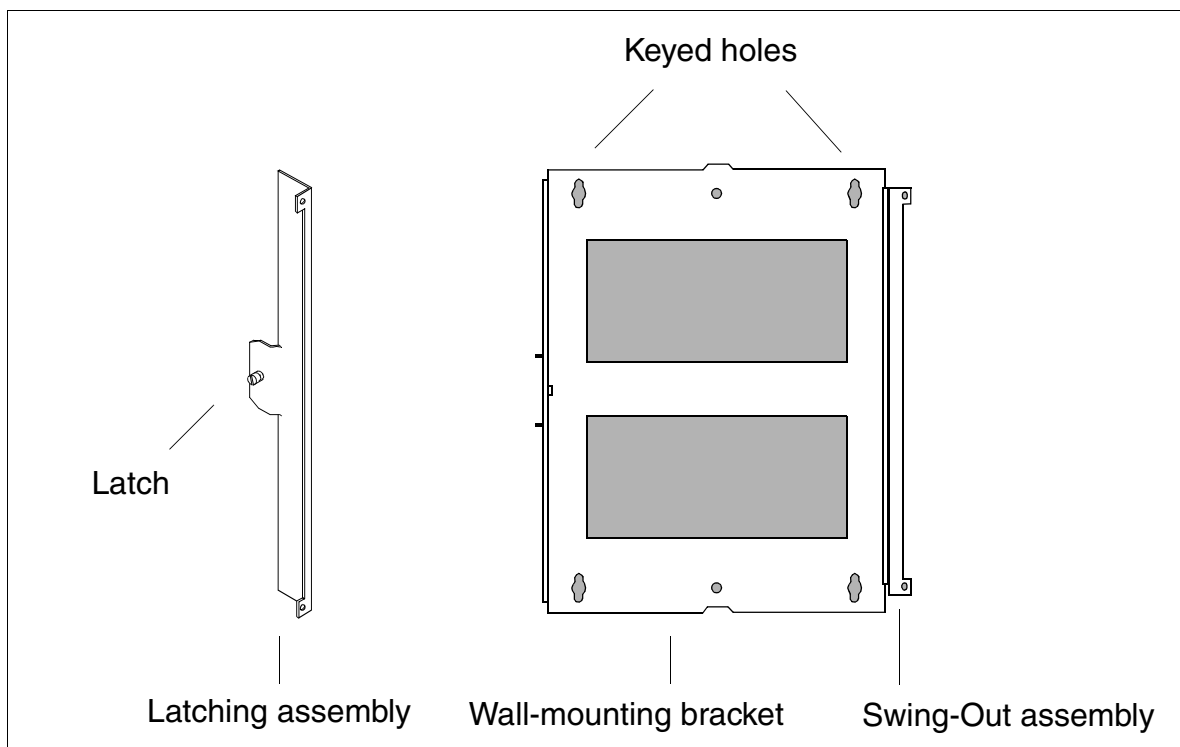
HiPath 3750 Wall-Mount Kit (for U.S. Only)
